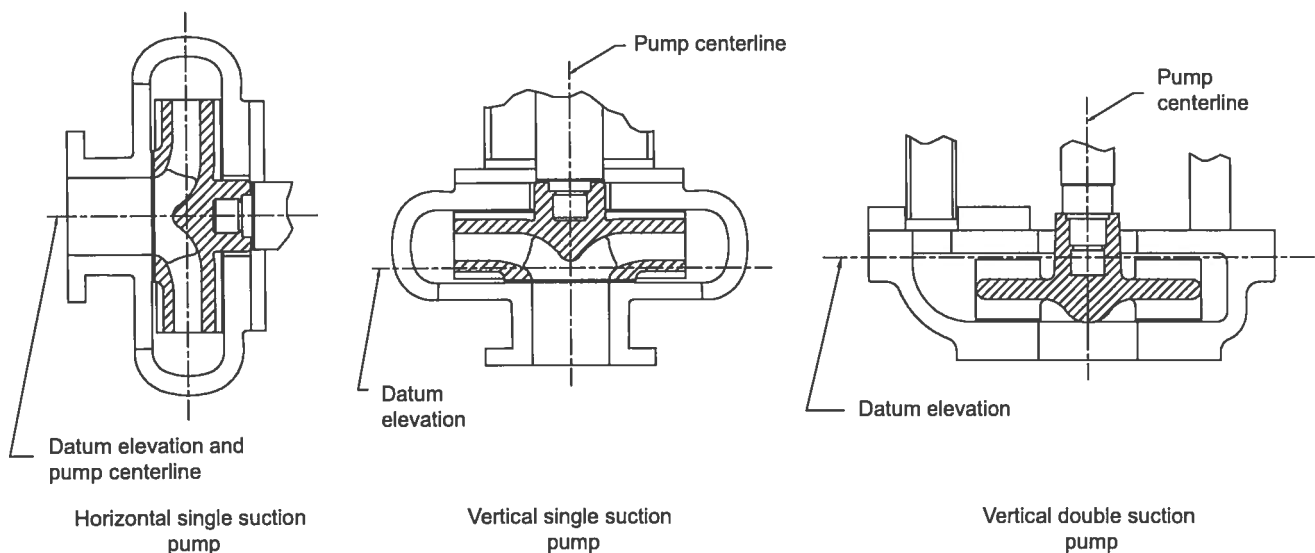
Datum elevations for various slurry pump designs
